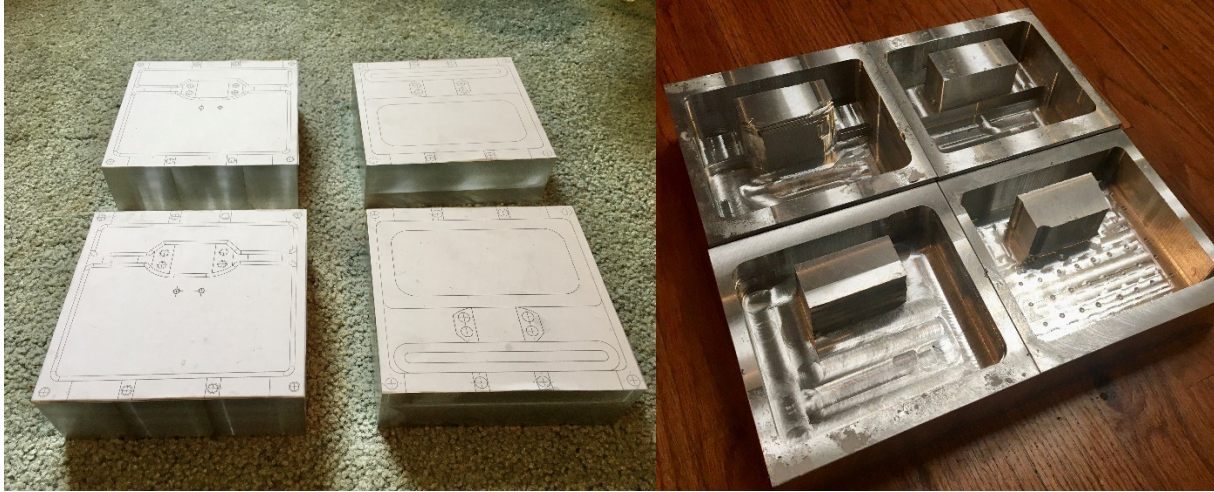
Aluminum Raw Stock for Housings and After Manual Machining Work
